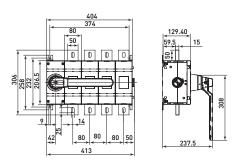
Overall and installation dimensions of 1000-1600 A 4P switch disconnectors
